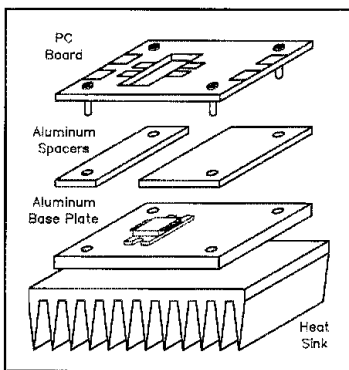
Mechanical assembly of the amplifier-module PC board, aluminum spacers and heat sink.
